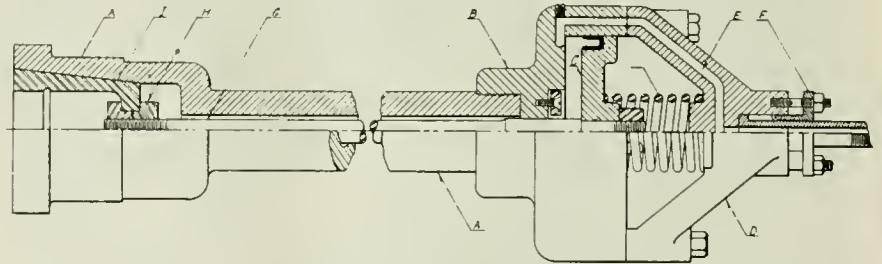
AIR CHUCK EQUIPMENT OF LATHES.
